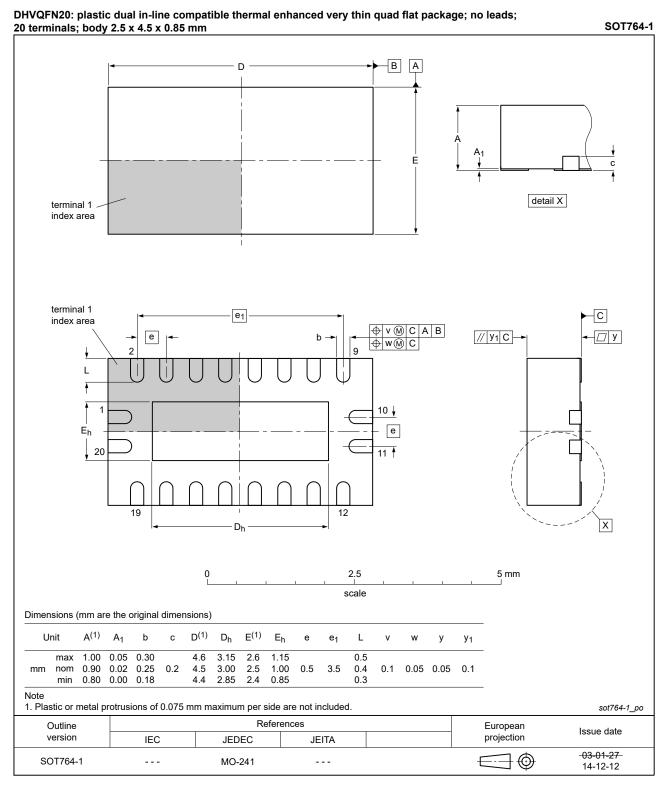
Package outline SOT764-1 (DHVQFN20)
